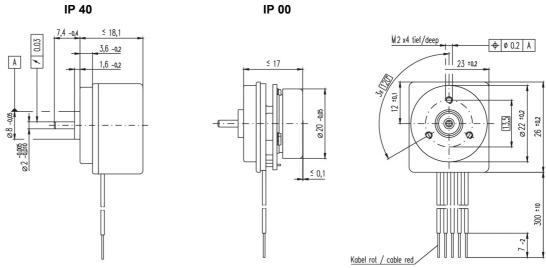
2 Watt Version – Dimensional Drawing [mm]
